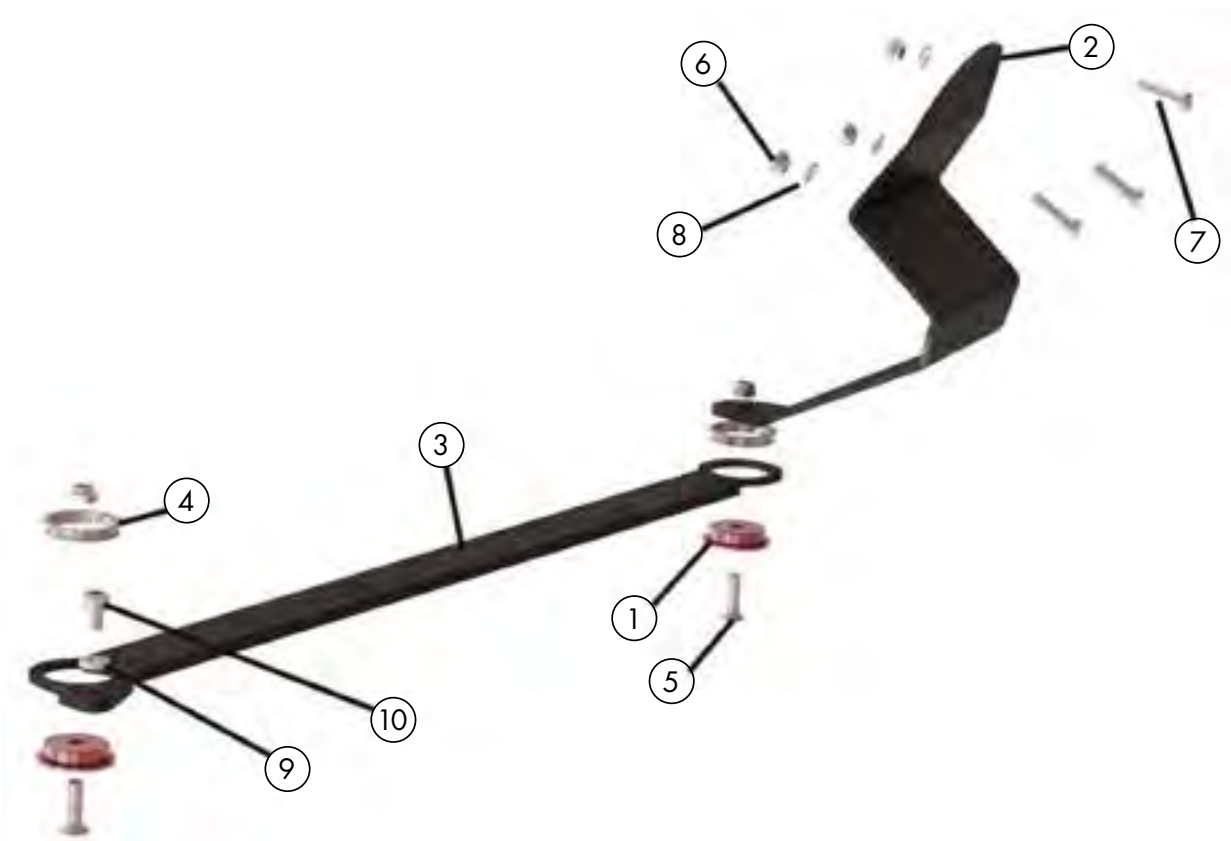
DOOR MOUNTING KIT FORD TRANSIT "EXPLOSION"
